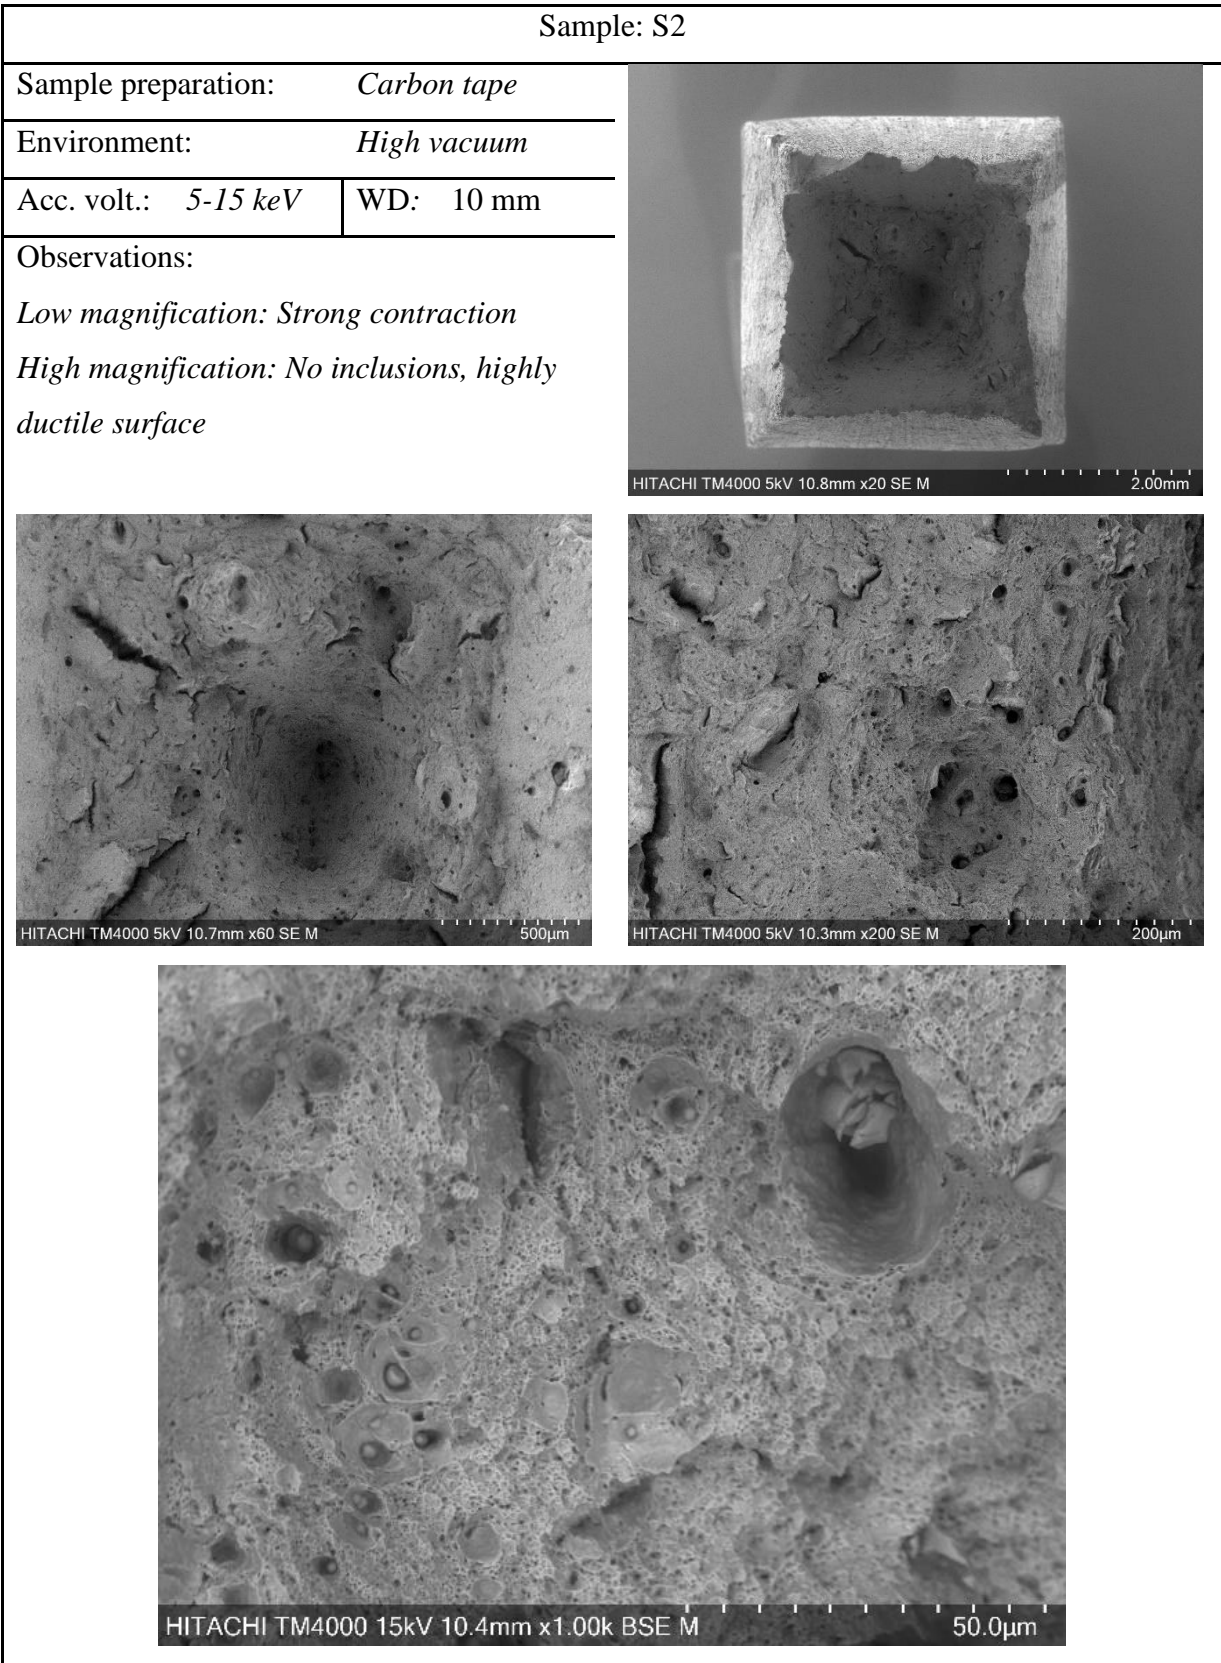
S2 test specimen fracture surface electron microscopic images
